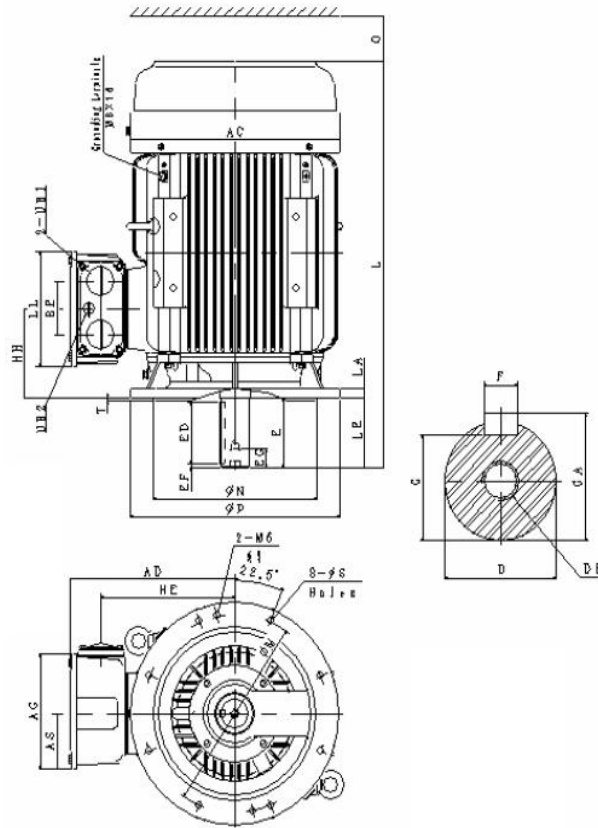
Outline drawing of cast iron design, mounting V1; frame size 225 – 250
